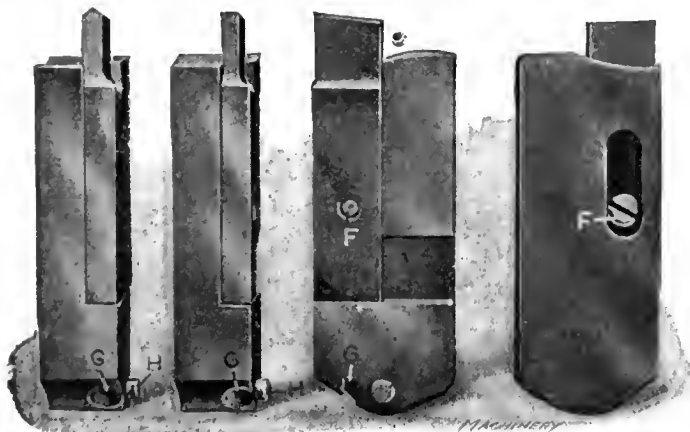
CUTTER HOLDERS WITH ADJUSTABLE BLADES SHOWING PIN FOR ENGAGING FEED CAM.
